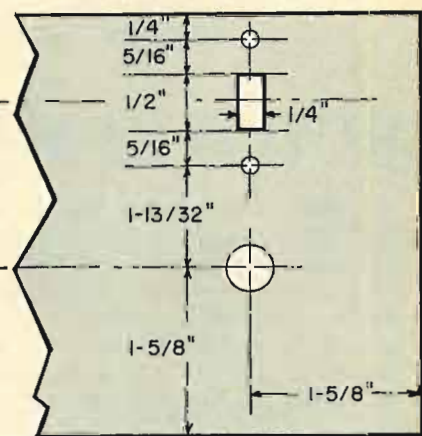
Be accurate in locating the hole, to match PC board mounted S1 and R3.
